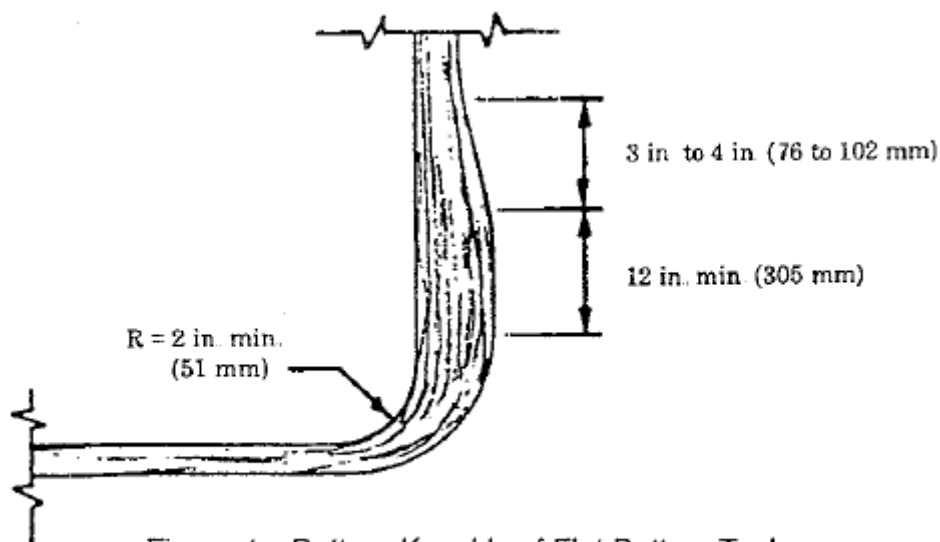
Bottom Knuckle of Flat-Bottom Tank
